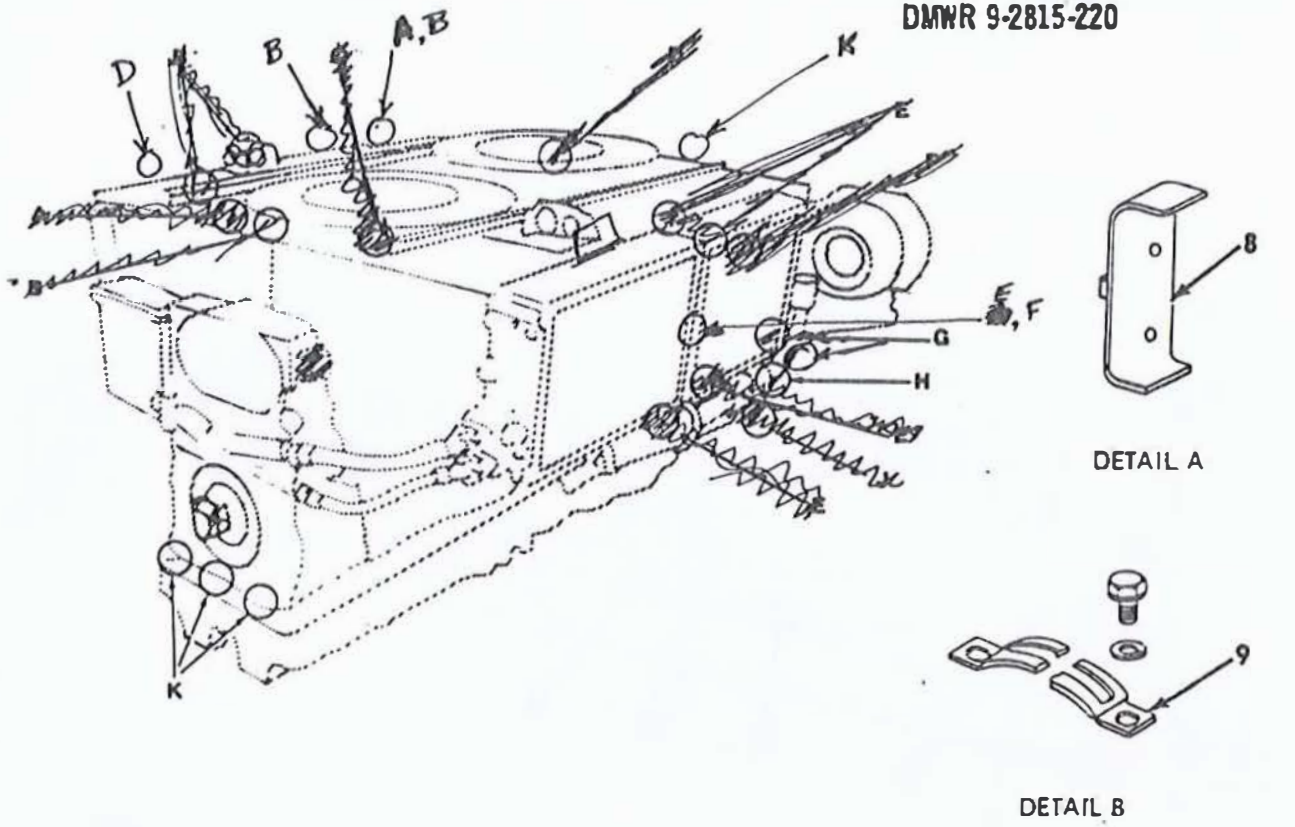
Engine wiring harness brackets and clamps (Sheet 1 of 3)
